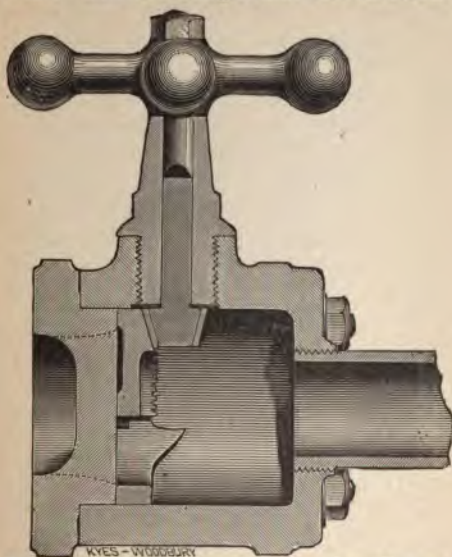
THROTTLE VALVE, STRAIGHT-LINE ENGINE.
